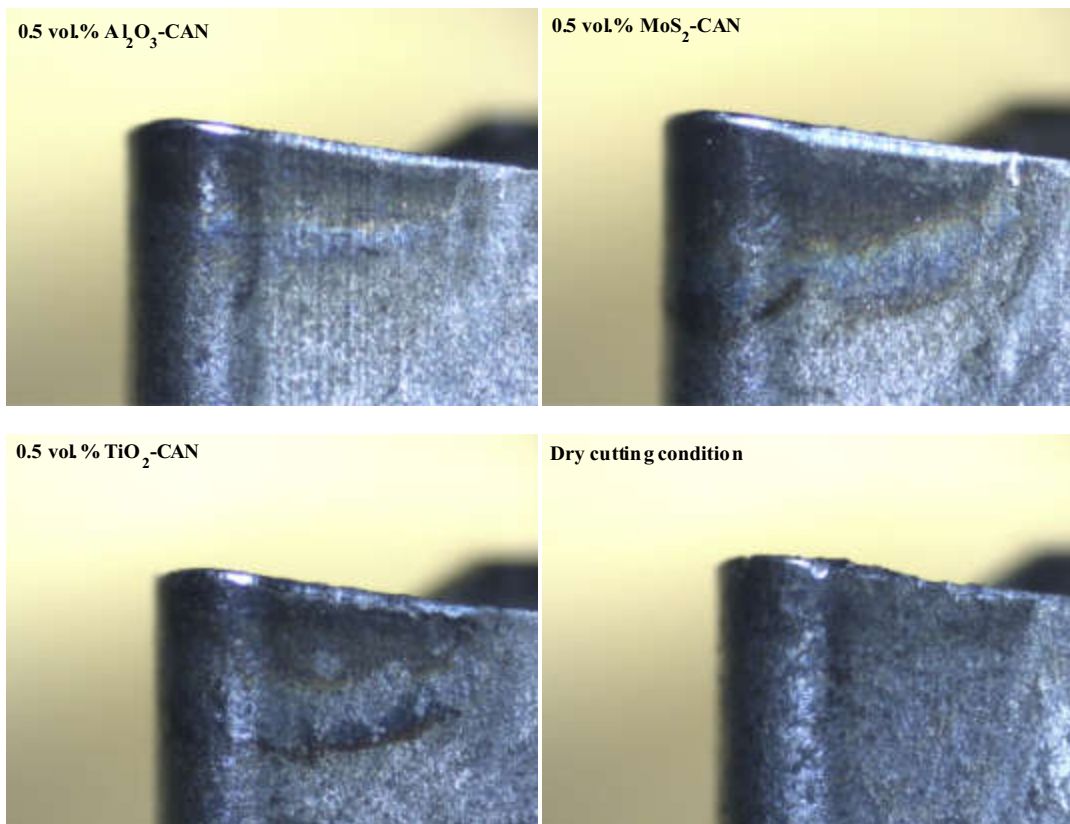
Flank wear of the cutting inserts at different cutting conditions.
